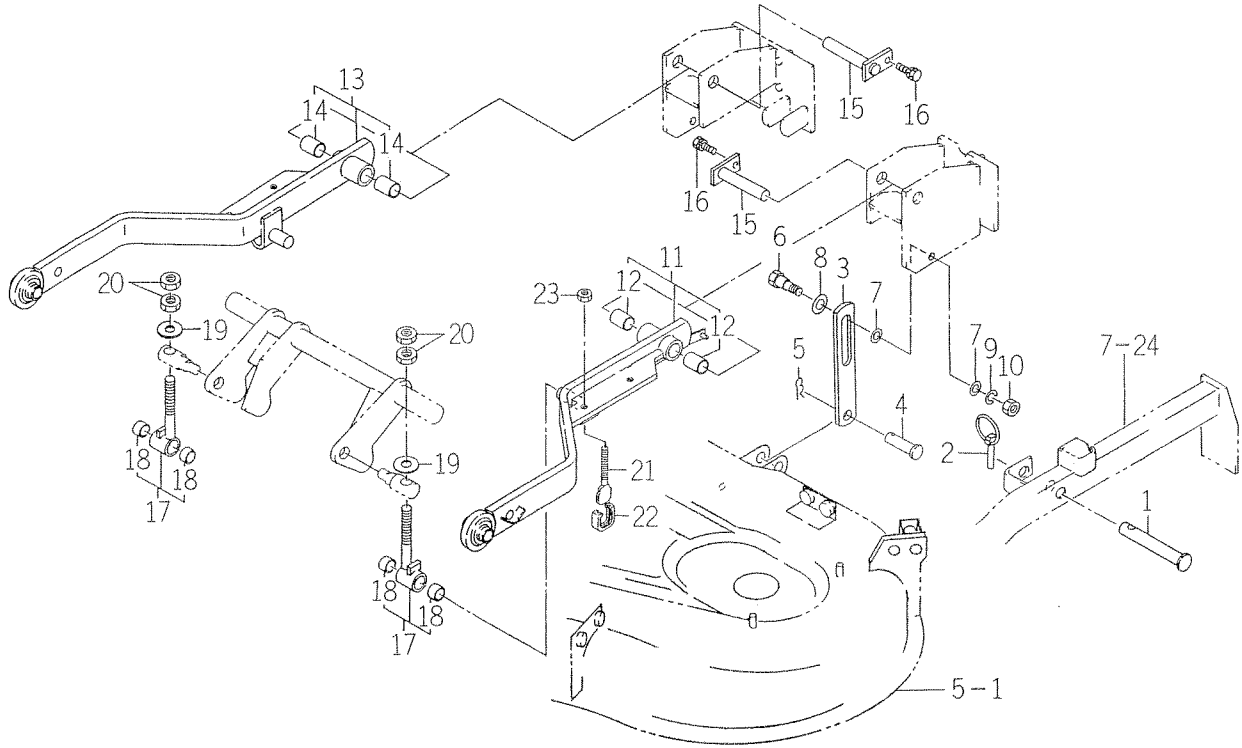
GAUGE WHEEL SYSTEM (M TYPE)
